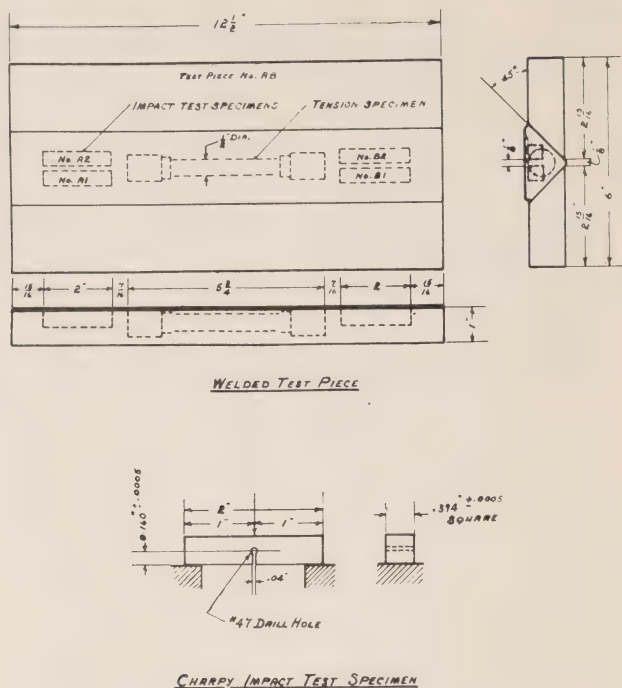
LOCATION OF SPECIMENS REMOVED FROM WELDED TEST PIECES
